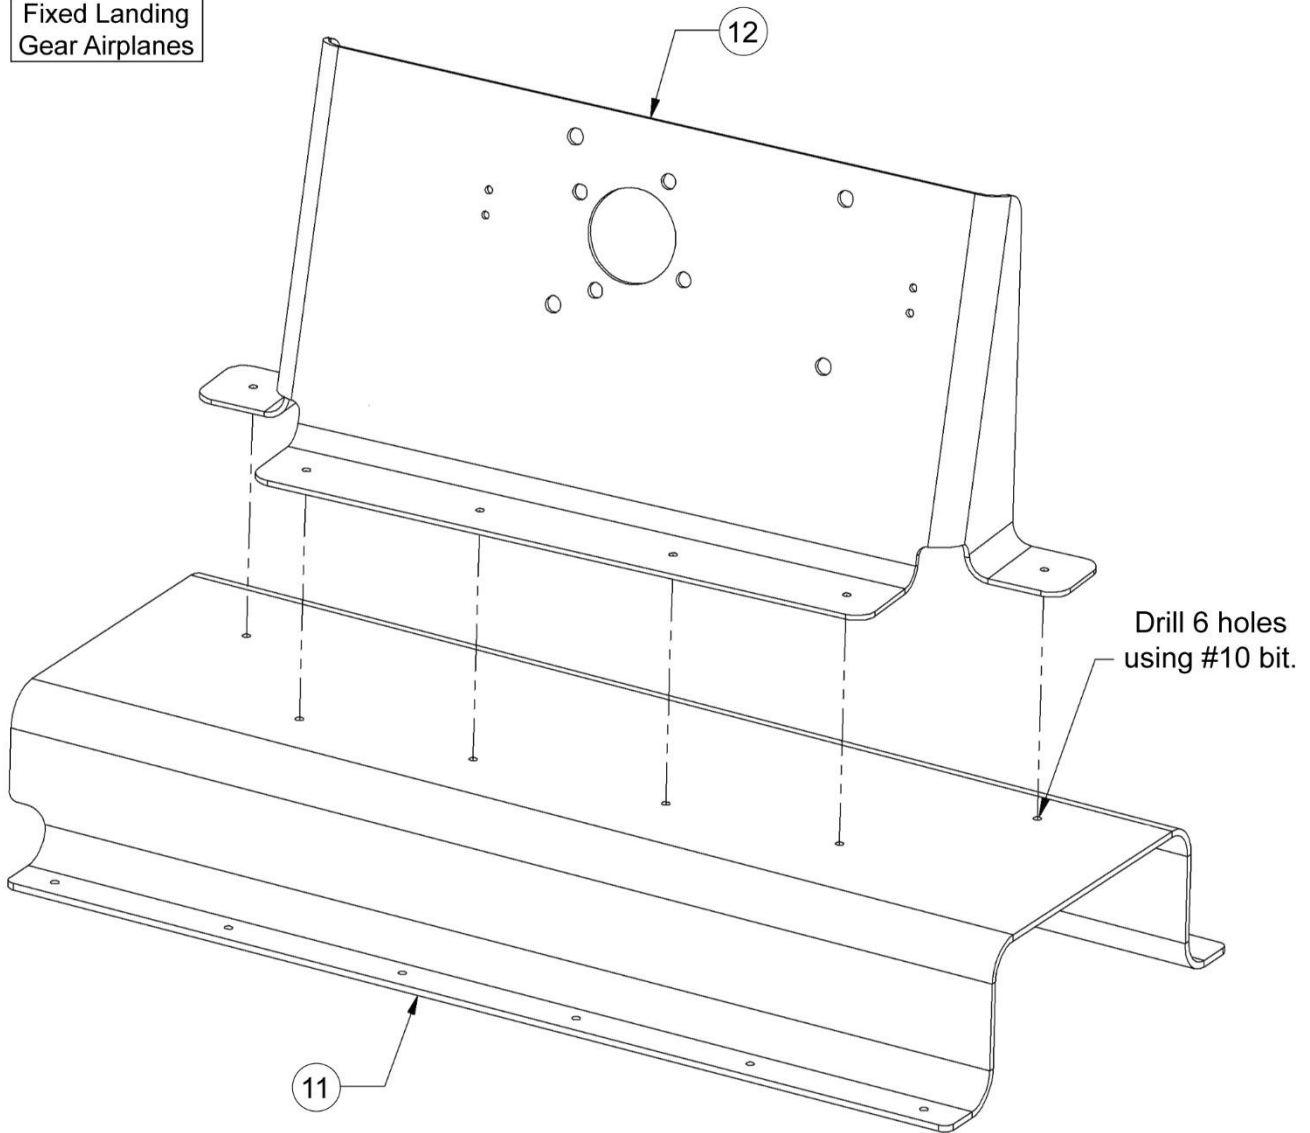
Drilling Holes for Pitch Servo Riser Bracket
